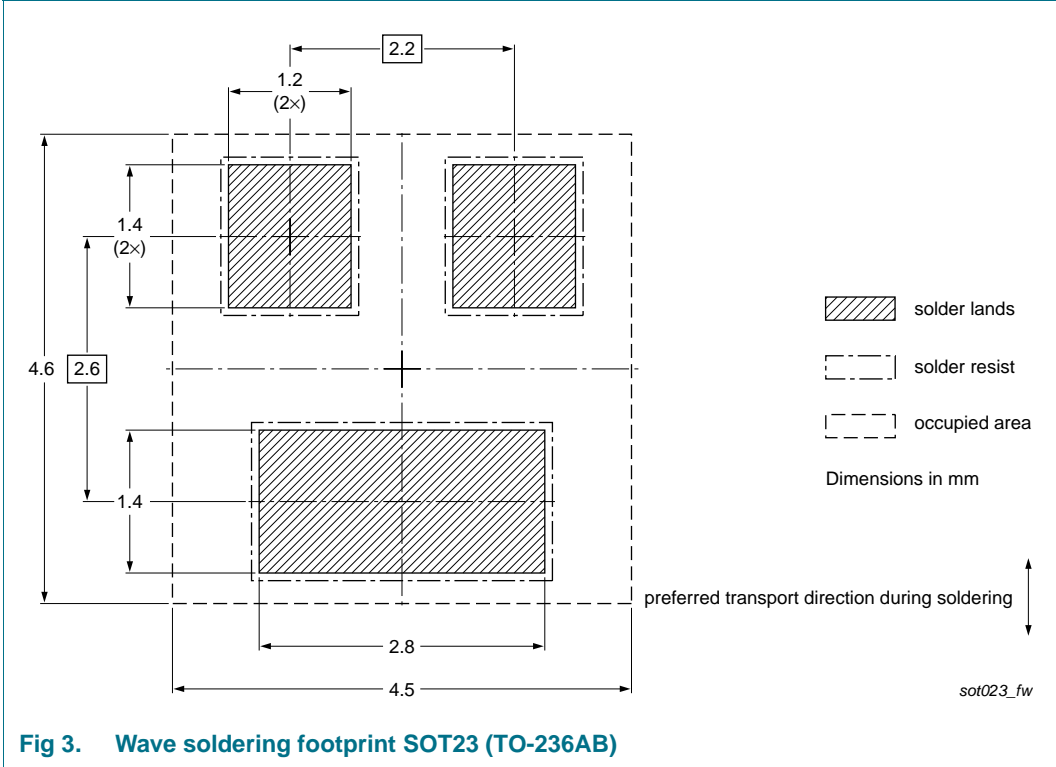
Wave soldering footprint SOT23 (TO-236AB)
